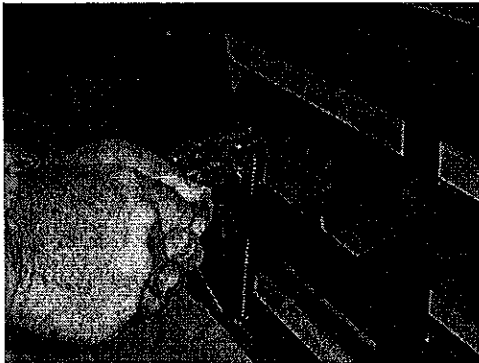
Spring loading technique with locking pliers to grip spring and using the yoke connector bar as leverage to stretch spring into position.
